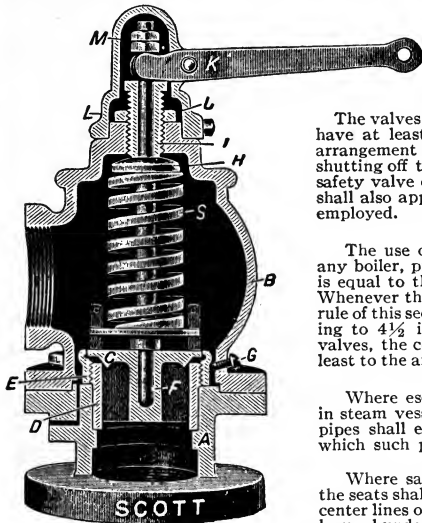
Scott spring pop safety valve. *The parts are:* A, base; B, iron case; C, bronze valve or disc; D, bronze bushing or seat; E, adjustable ring; F, steel stem and spindle; G, screw to hold adjustable ring; H, spring plate; I, bronze loading bolt; J, lock nut; K, lever (malleable iron); L, iron cap and screw to hold cap; M, stem or lifting nuts.
